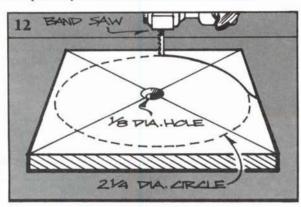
Drill a ¼ in. shank hole in the center of the lid stock and countersink the hole. Then lay out and cut the circle on the band saw.
